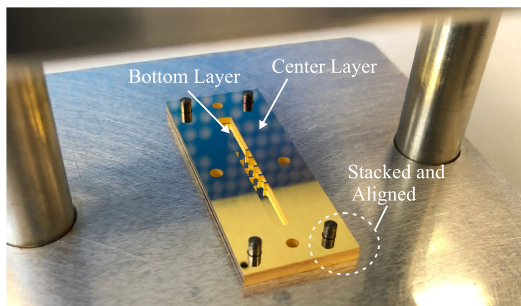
Partial assembly of the prototype; the gold (Au) sputtered bottom glass-layer chip and center glass-layer chip are stacked and aligned with high-precision pins prior to the bonding procedure. The bottom glass-layer chip can be seen clearly through the channel of the center glass-layer chip.
